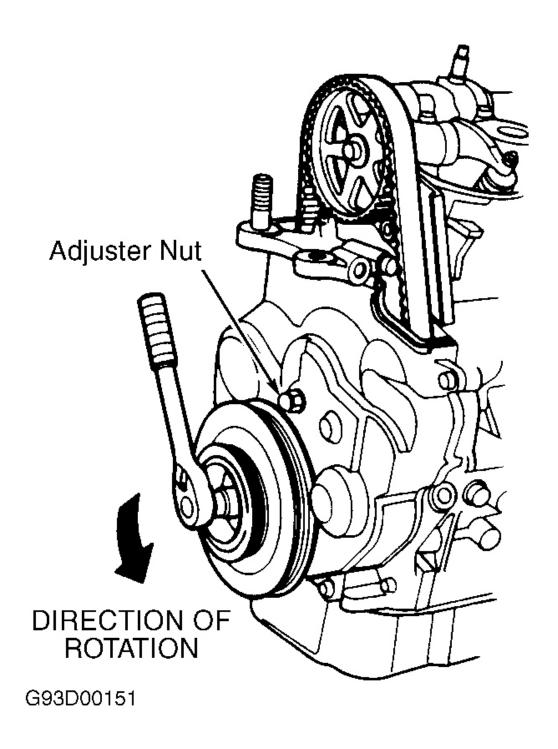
Locating Timing Belt Adjuster Nut (Typical) Courtesy of AMERICAN HONDA MOTOR CO., INC.
